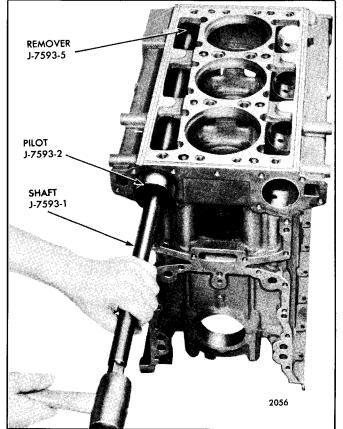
Removing End Bearing with Tools J 7593-1, J 7593-2 and J 7593-5
